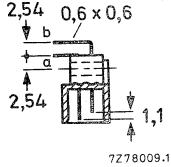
90° angled dip-solder pins, with protruding earth contacts.
